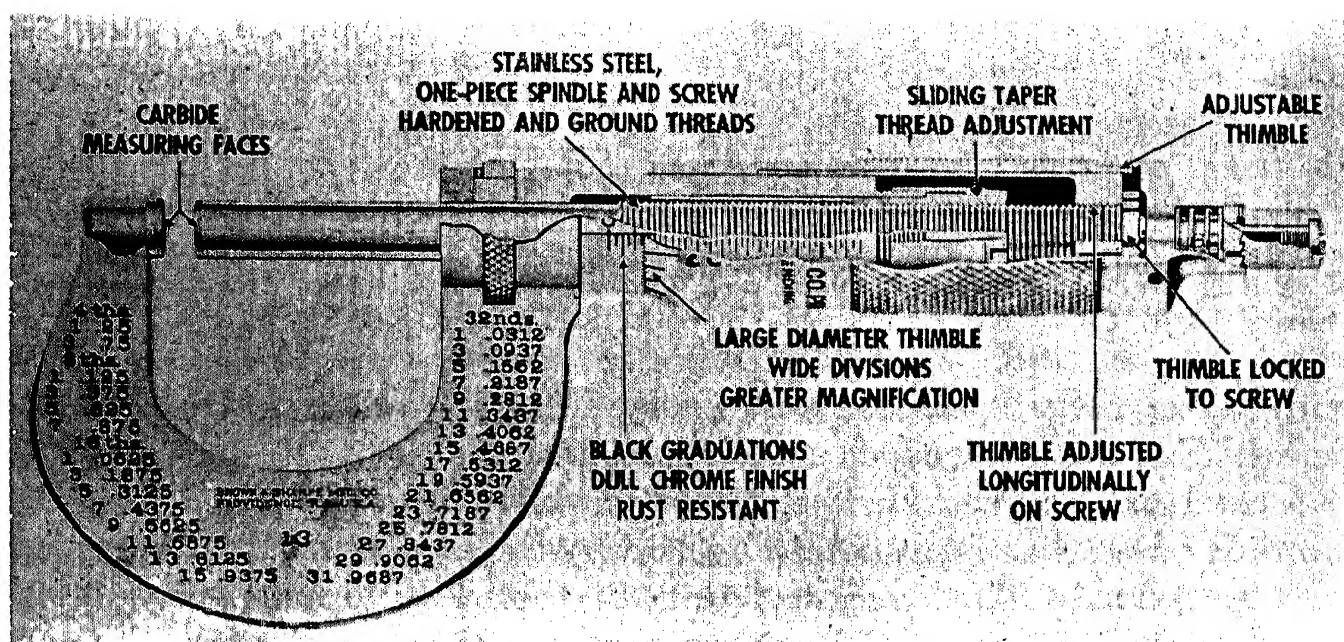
A sectional view of a micrometer caliper. (Courtesy Brown and Sharpe Mfg. Co.)
